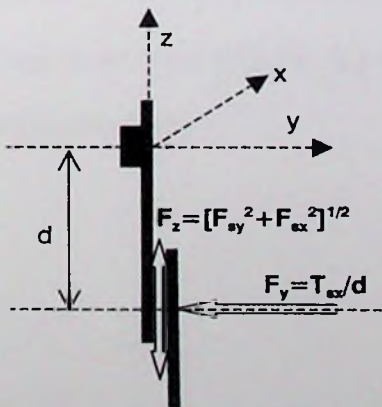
FORCE/TORQUE SENSOR & BLADE ASSEMBLY
